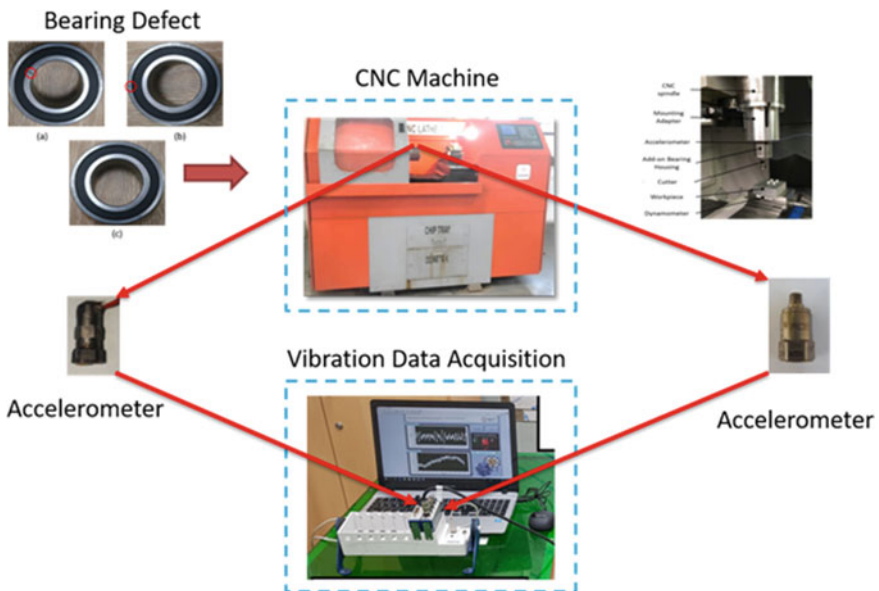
Bearing fault diagnosis framework for CNC machine tool
